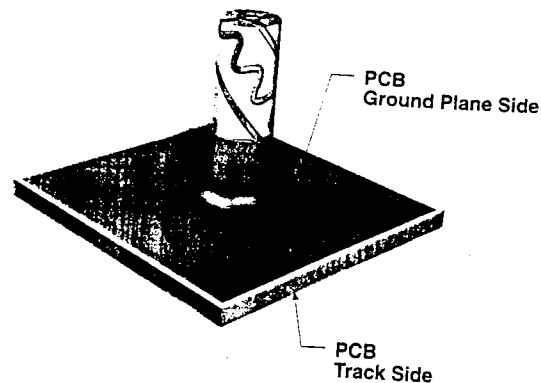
Circuit Board Mounting of Dielectric Loaded Volute
